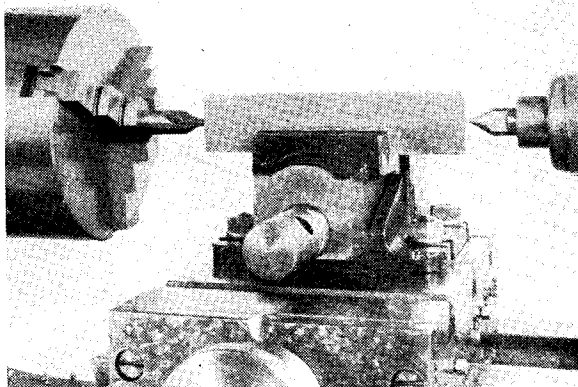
A machine vice used for mounting the bar on the cross-slide
